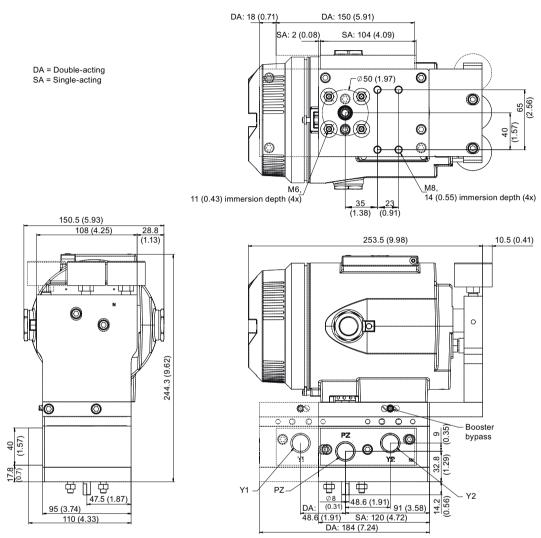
Dimension drawings booster mounted on positioner in a flameproof enclosure, dimensions in mm (inch)
